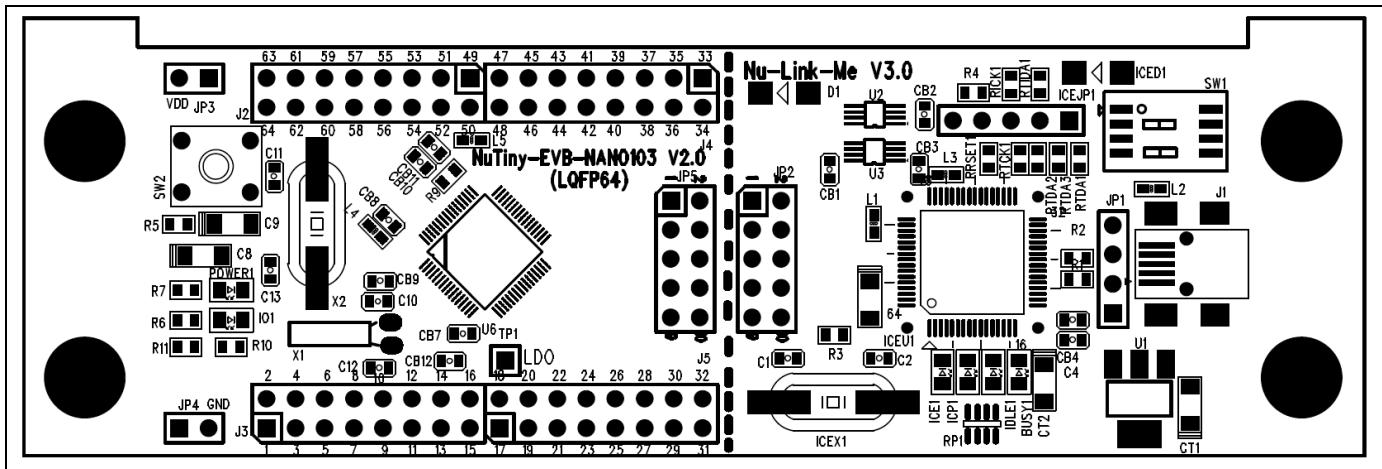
NuTiny-SDK-NANO103 PCB Placement
